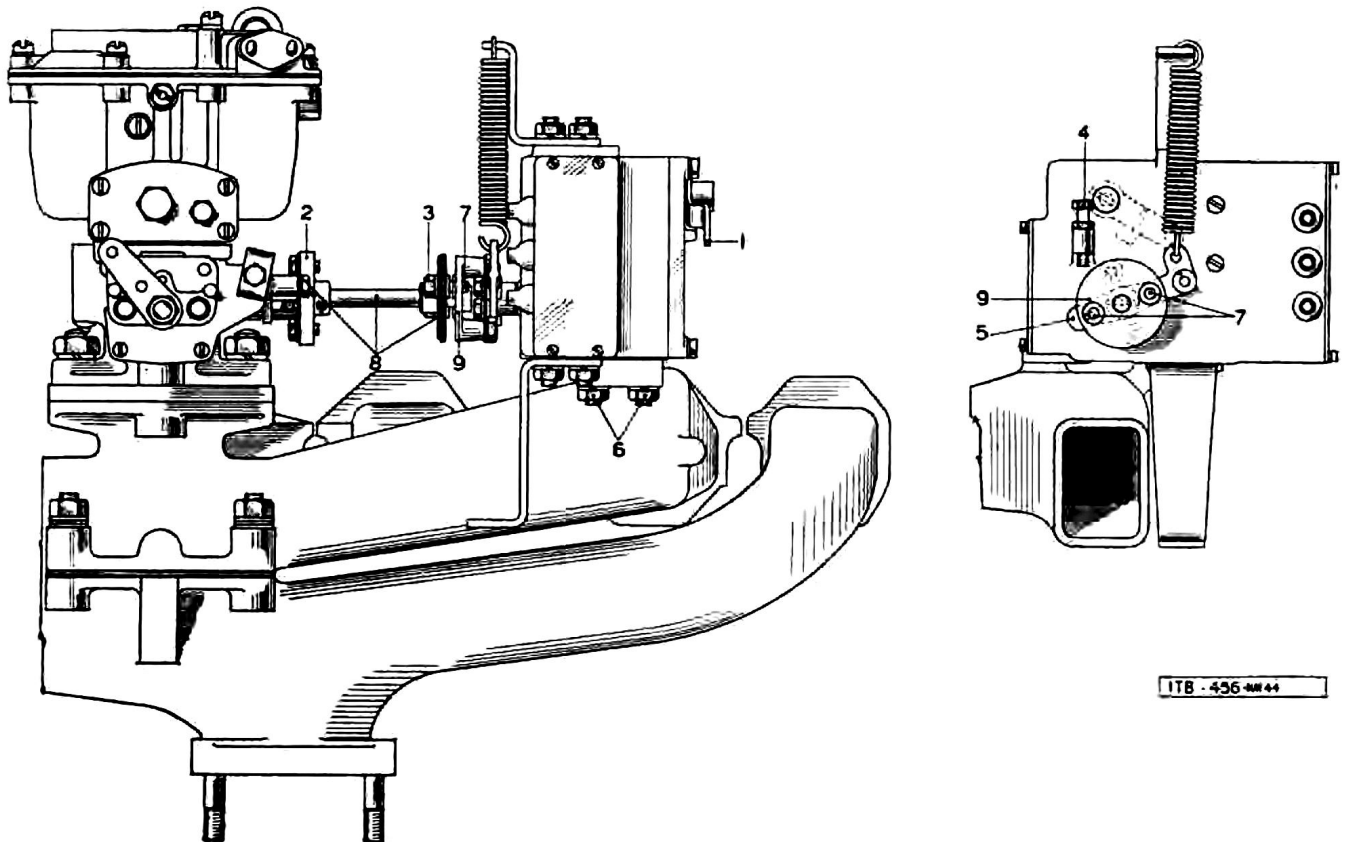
CONTROL BOX AND OPERATING SHAFT.
